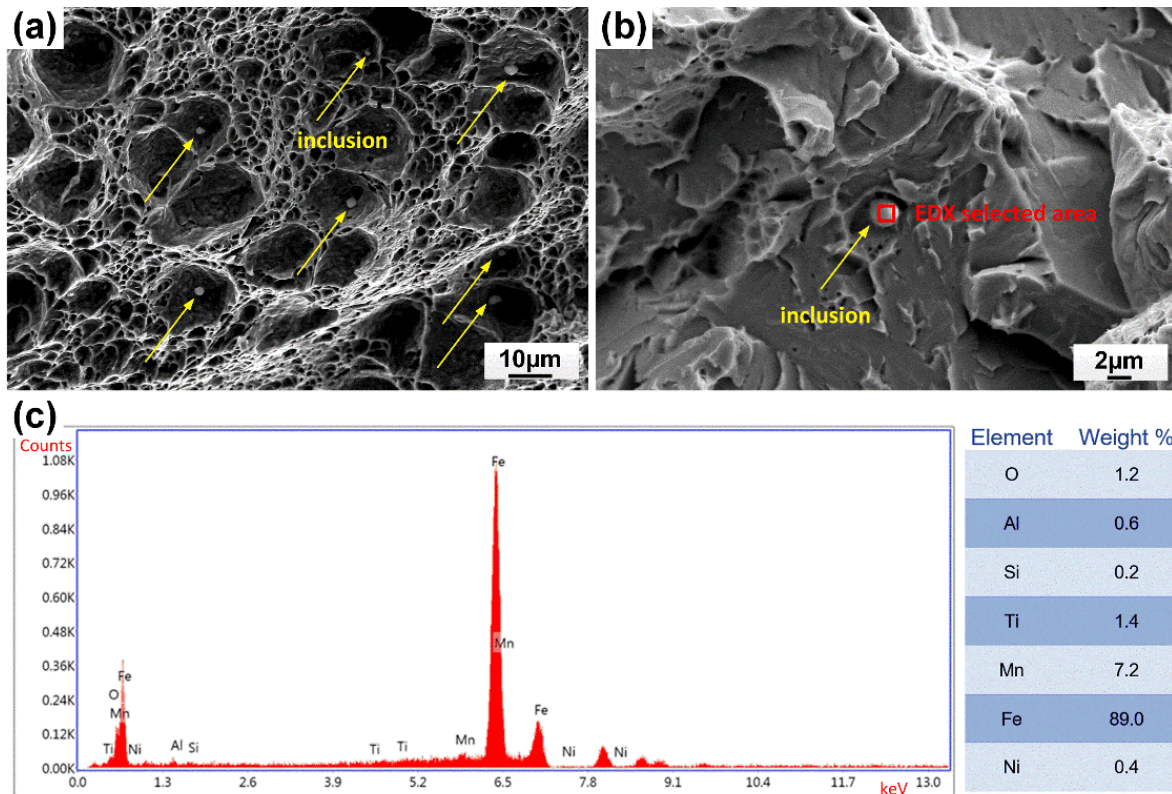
(a) SEM image of Charpy fracture surface showing the presence of inclusions in the weld metal of cold-wire laser weld with a WFR of 12 m/min, tested at 0 °C; (b) SEM image of Charpy fracture surface showing the EDS scanning area and the presence of inclusion in the weld metal of cold-wire laser weld with a WFR of 12 m/min, tested at -20 °C; (c) EDS spectrum and chemical composition of the inclusion.
